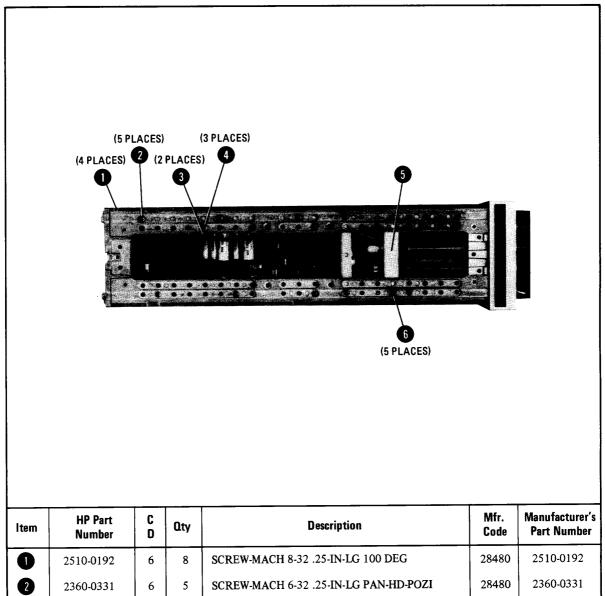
Illustrated Parts Breakdown, Right Side View
